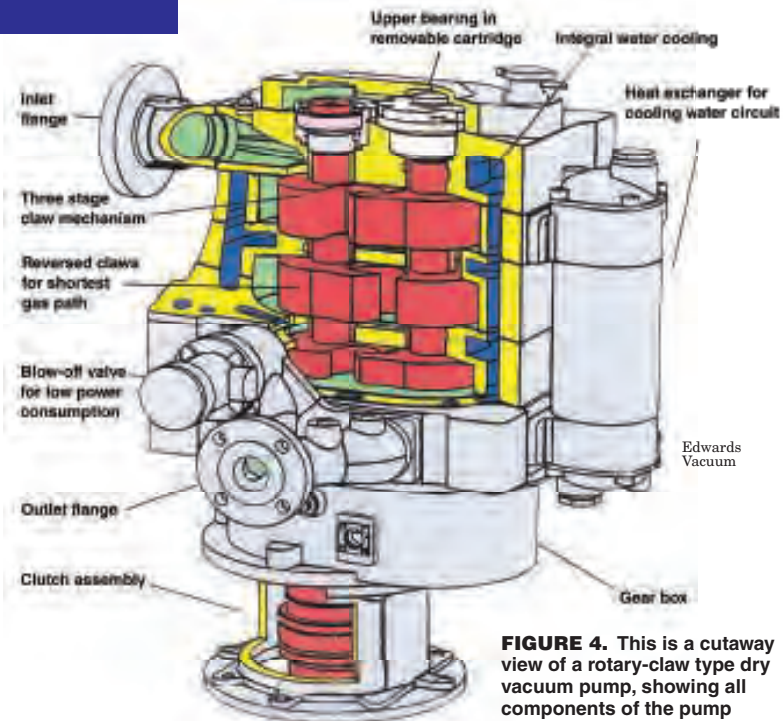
This is a cutaway view of a rotary-claw type dry vacuum pump, showing all components of the pump
